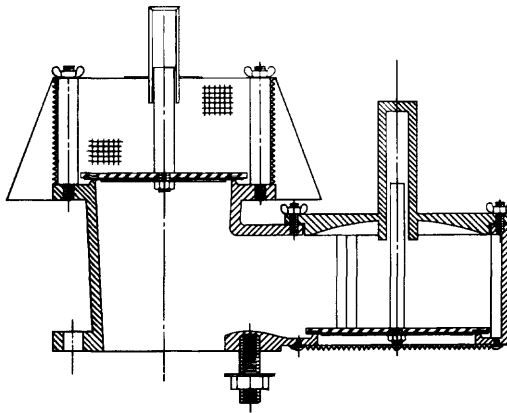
Typical pressure/vacuum valve (courtesy of Groth Equipment Corp.).
